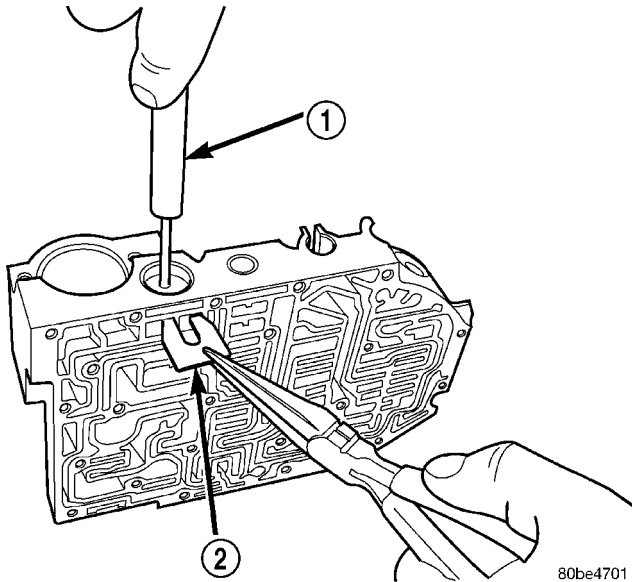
Install Regulator Valve Spring Retainer using Tool 6302
